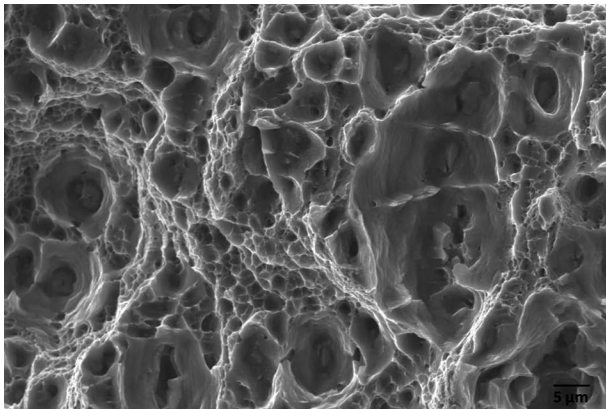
High magnified image of the fracture surface shown in Fig. 190
